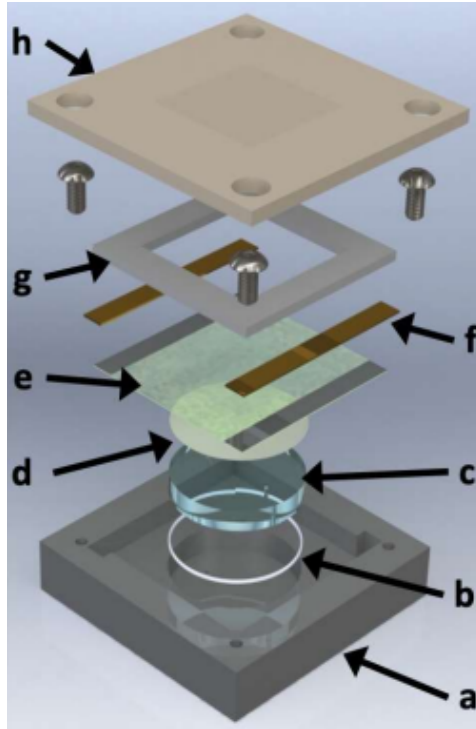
Exploded CAD view of the μ STAMPS thruster.
